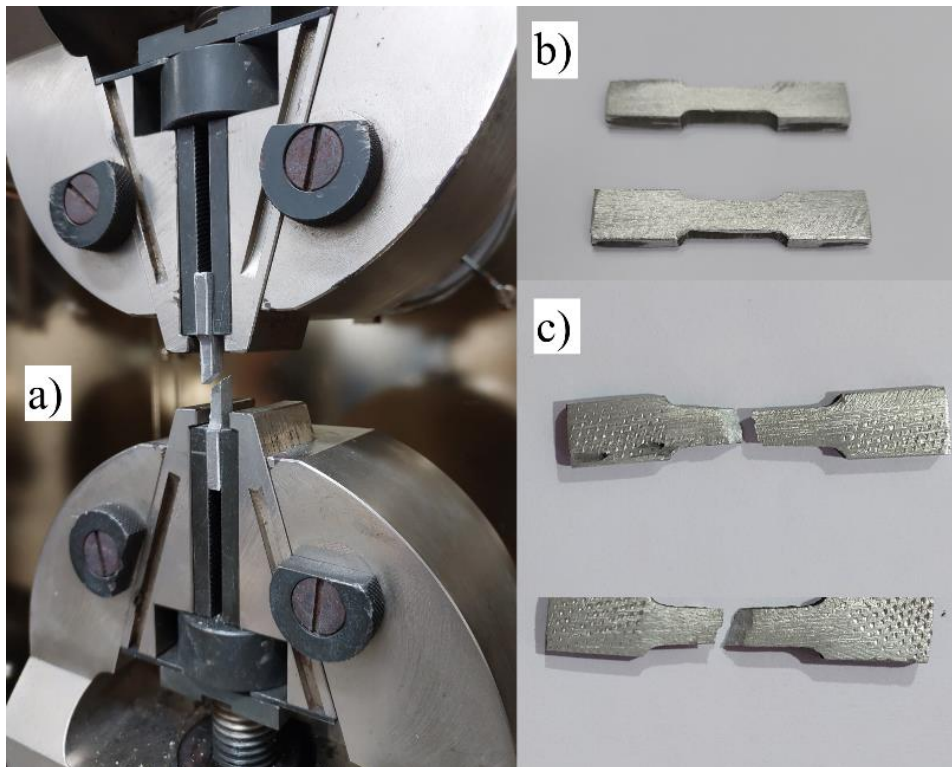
Universal Testing machine (a), samples before (b), and after Tensile Test (c)
